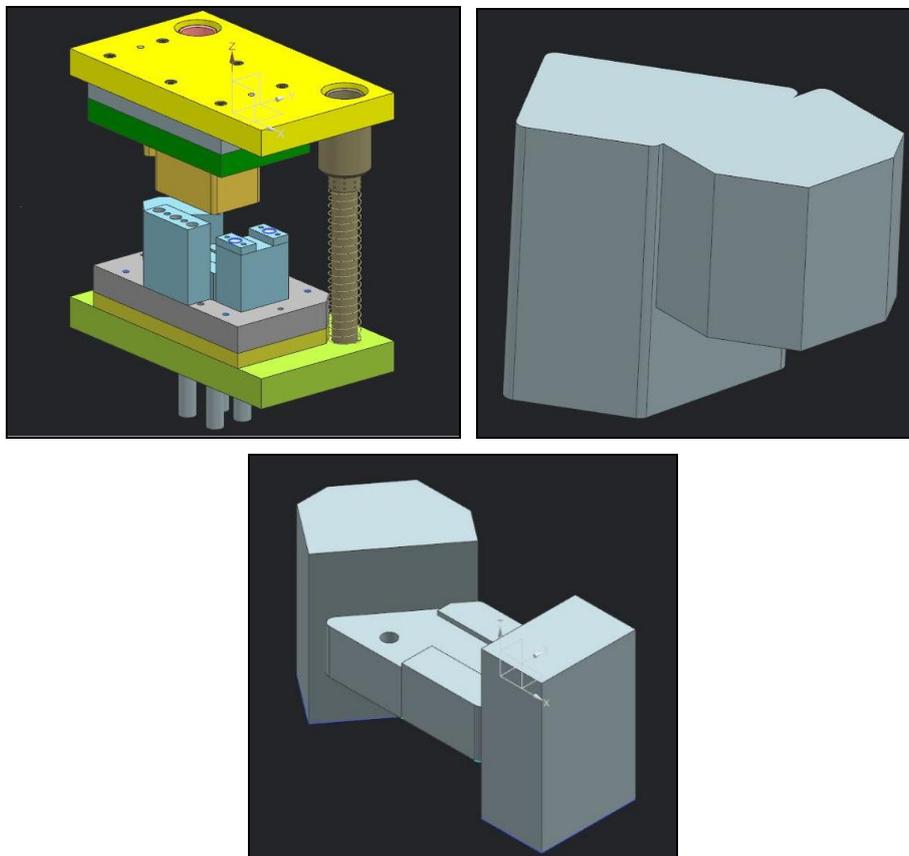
Forming tool, Punch and Dies used for Forming Operation.
